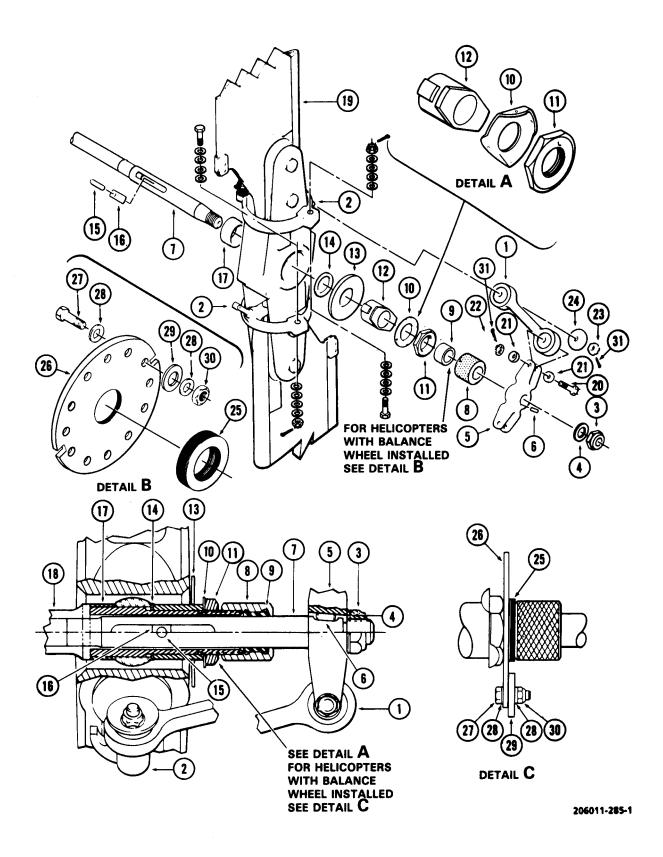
Tail Rotor Removal/Installation (Sheet 1 of 2)
